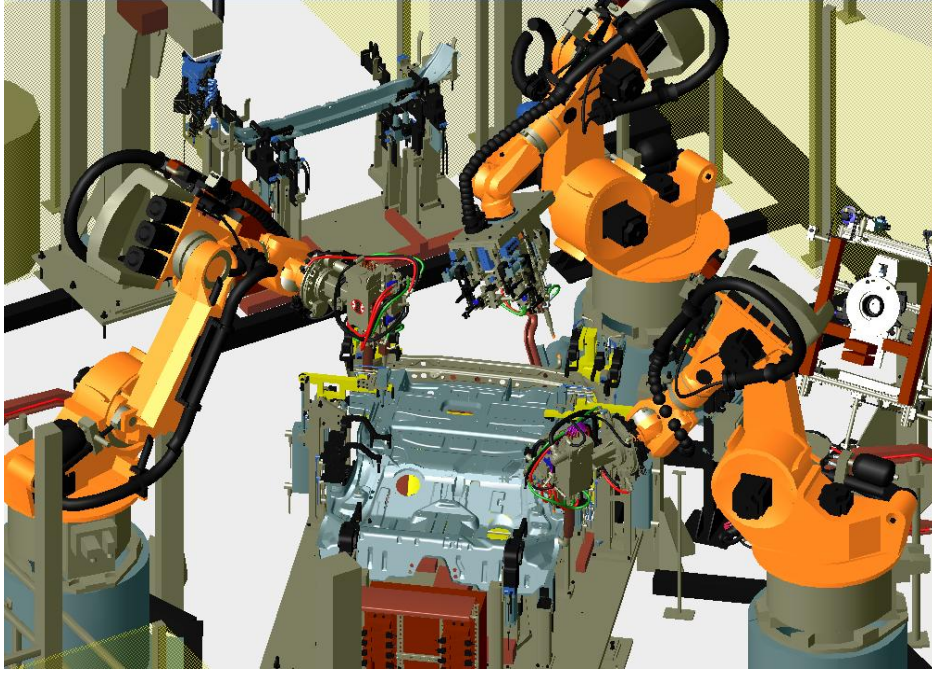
A snapshot from a robot simulation tool where three robots are assembling a part of the floor of a car by putting parts in a fixture and welding them together.
